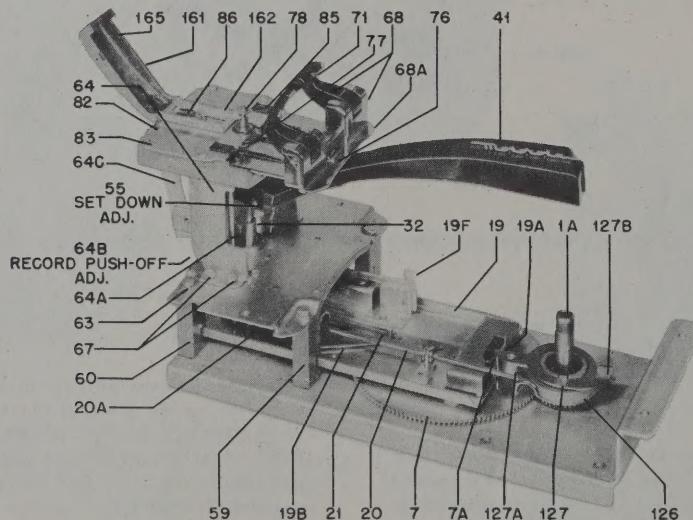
VIEW OF RECORD CHANGER WITH BASE & MOTOR ASSEMBLY REMOVED
